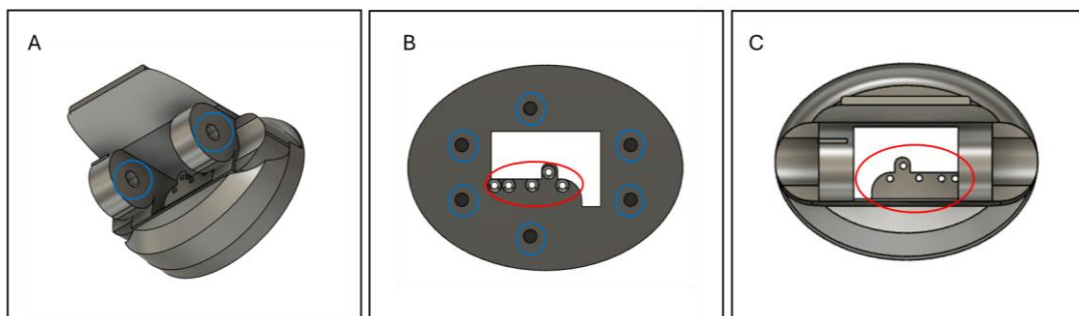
Wrist CAD Model (A) three plane view (B) back view (C) front view.
